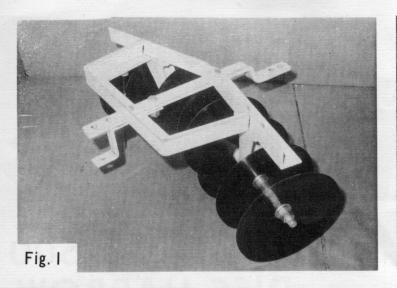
Fig. I shows Assembly of front Disk Harrow using Adaptor Coupler. The Coupler is used for attaching to Tractors equipped with tubular Sleeve Type Hitch only.
